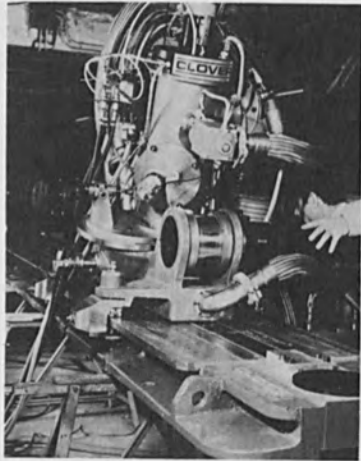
Local vacuum linear E.B. welding machine type 010.01
